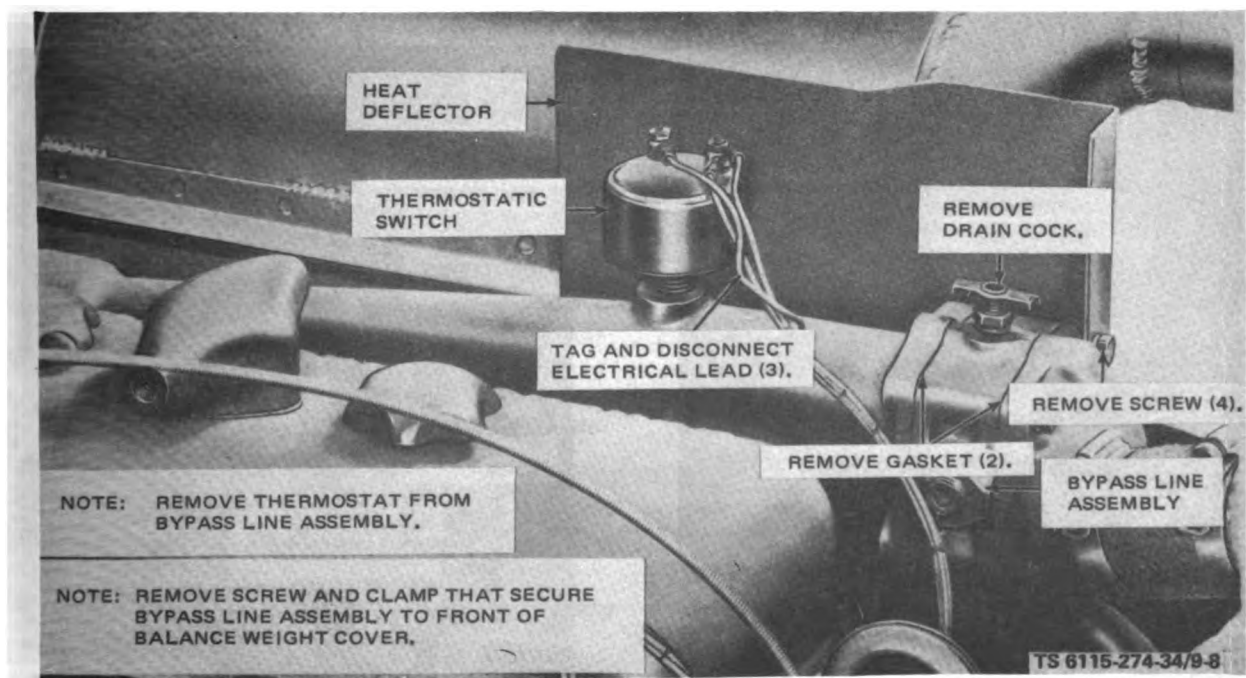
Bypass Line Assembly, Thermostat, Thermostatic Switch, and Heat Deflector, Removal and Installation
